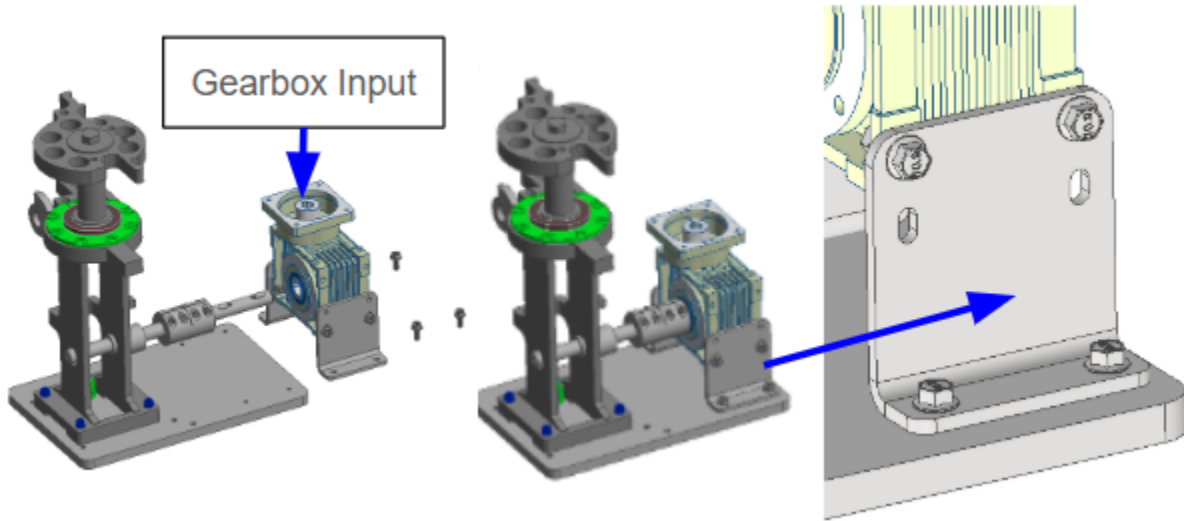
Gearbox mounted to the L-brackets and base plate
